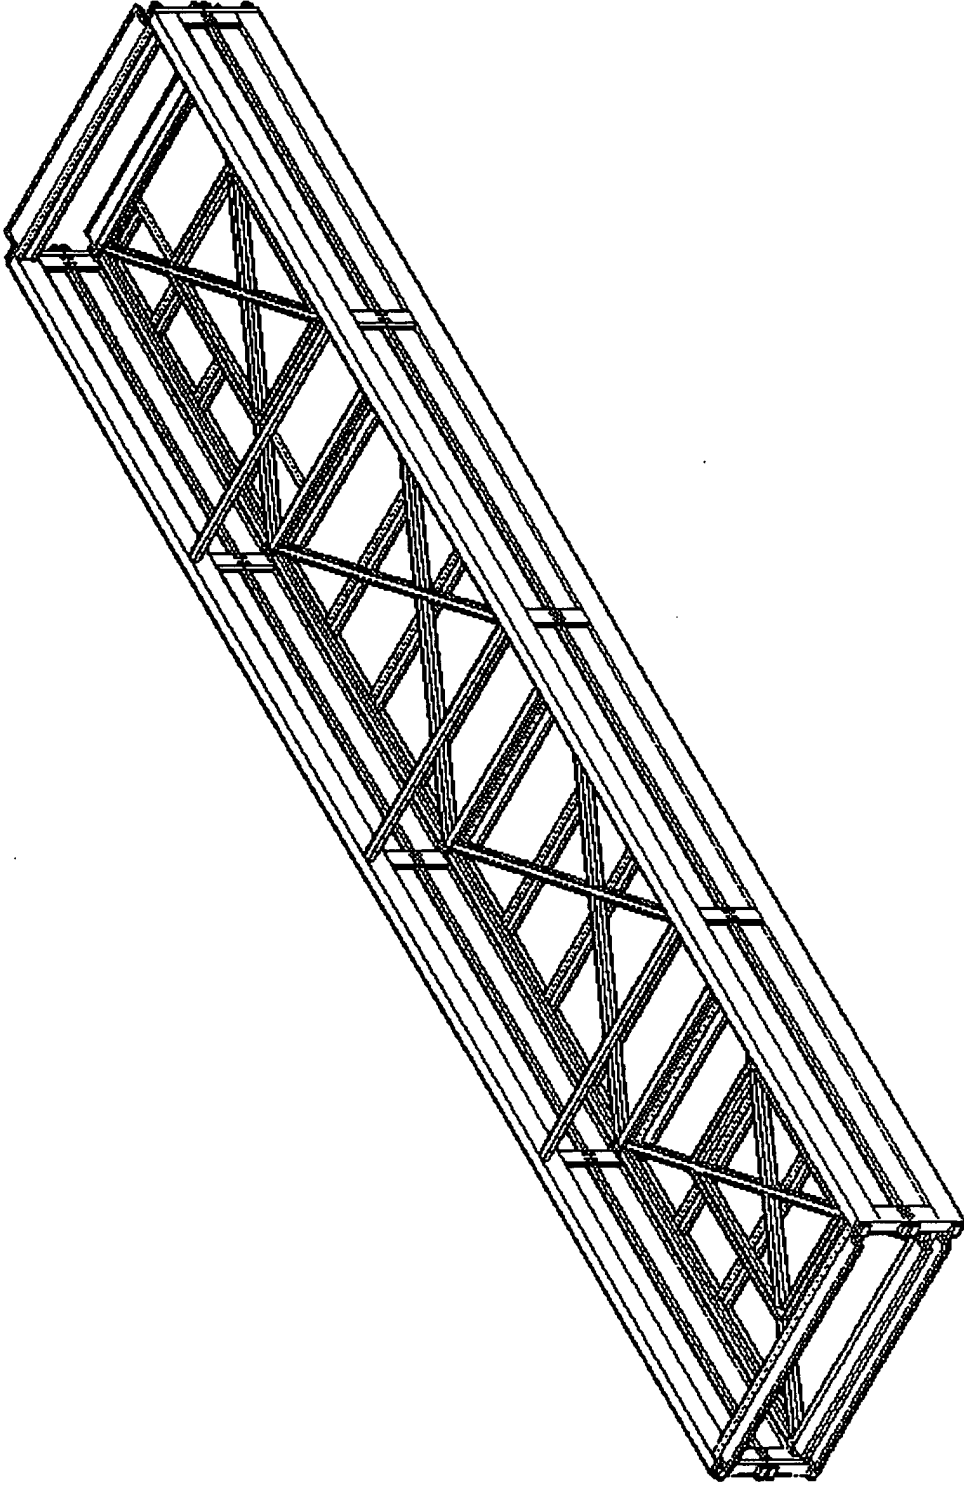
B: Isometric view of a ceiling frame stacked on top of a floor frame that contains a front frame and a back frame (40 foot high cube collapsible cargo container). This assembly is now referred as "collapsible cargo container frame panel assembly".
